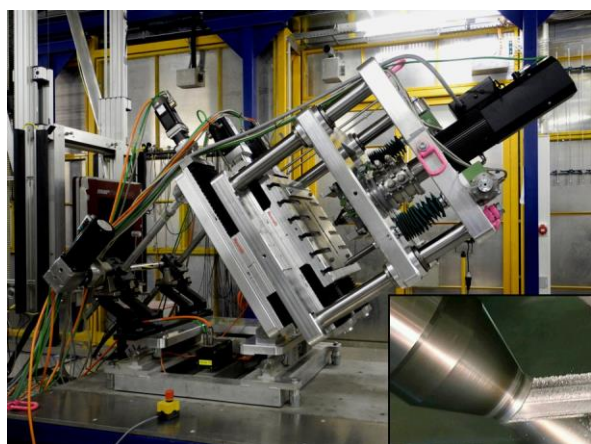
In situ friction stir welding machine "FlexiStir" at a HZG synchrotron beamline at DESY. The machine has a mass of 1.4 t and a height of 1.5 m. The inset shows the tool welding an Al alloy sheet.
